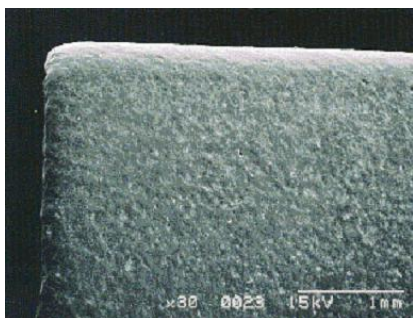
SEM photograph of the gear tooth surface after shotpeening.
